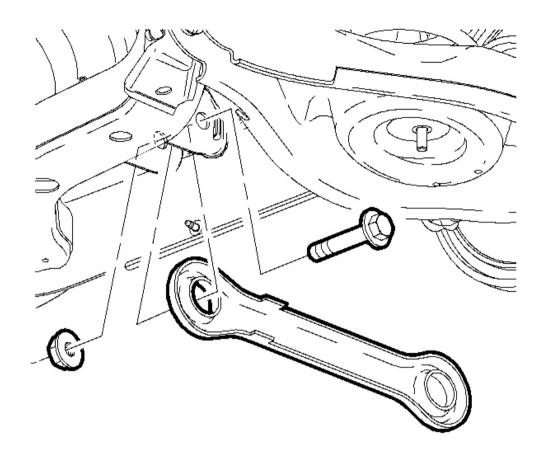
Toe Link, Support Nut & Bolt Courtesy of GENERAL MOTORS CORP.
